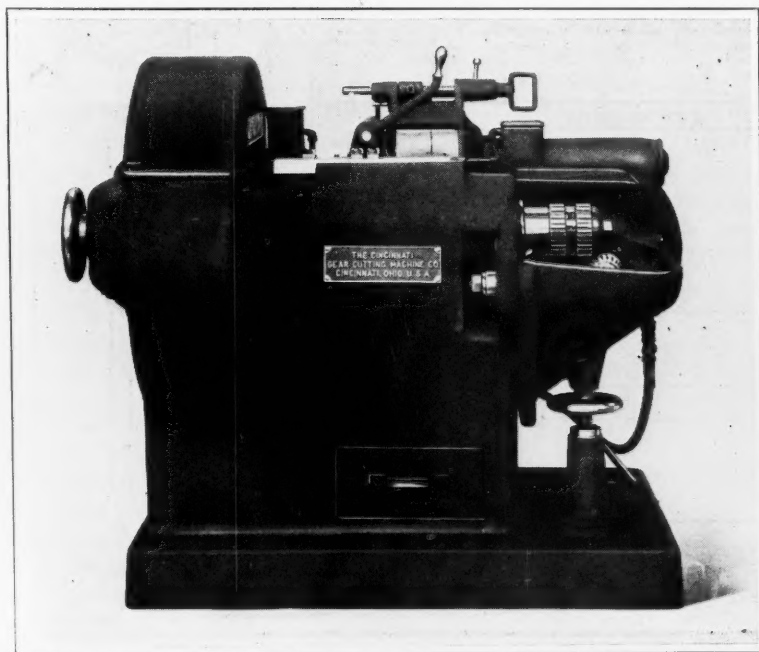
Cincinnati Simplified Gear-hobbing Machine
